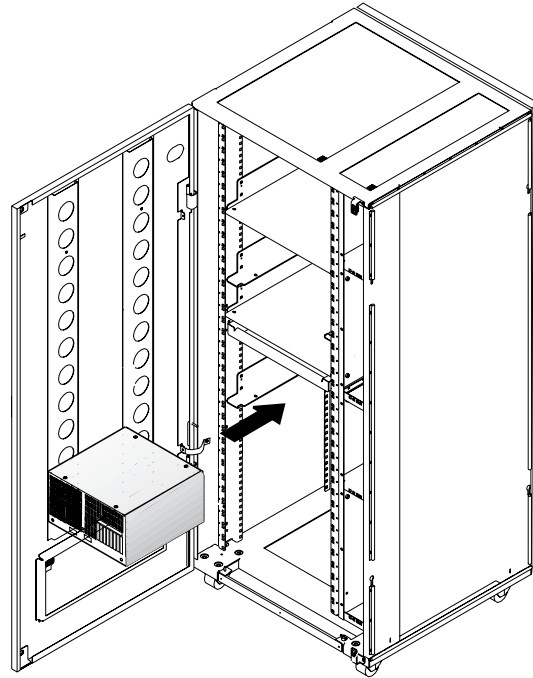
Installing the 3172 NNP-A Unit in the Controller Expansion (Rear Side)
